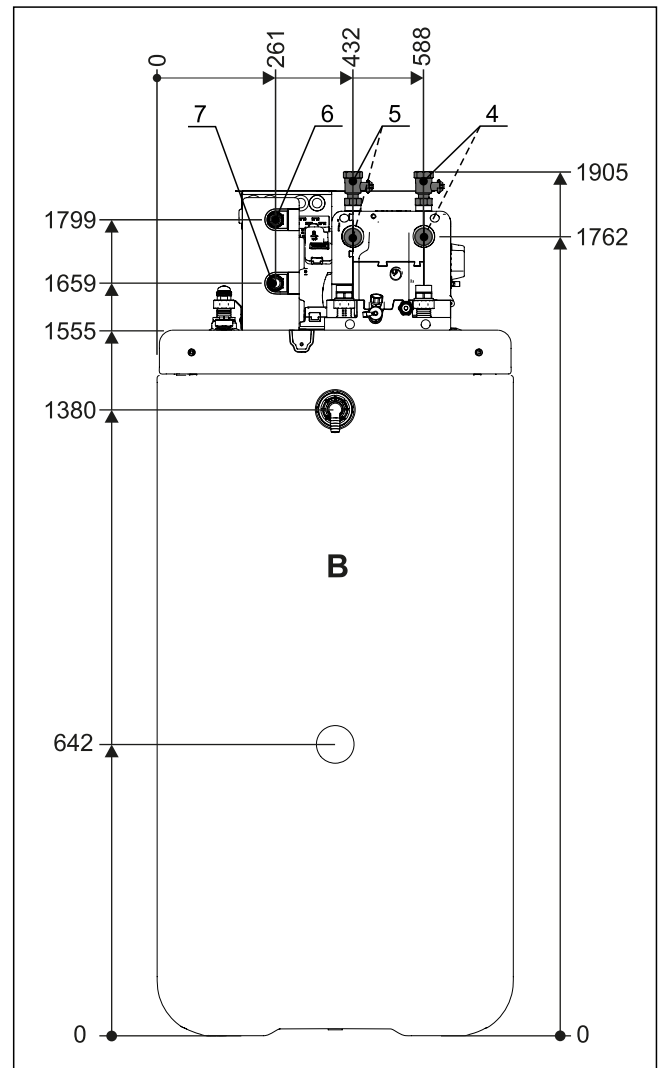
Dimensions, side view – type ETS(X/H)B16P50D
